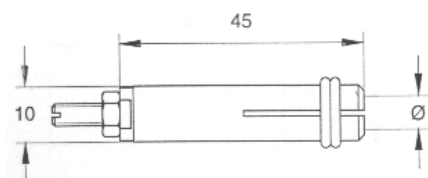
23 Explosion view standard contact pistol C0
